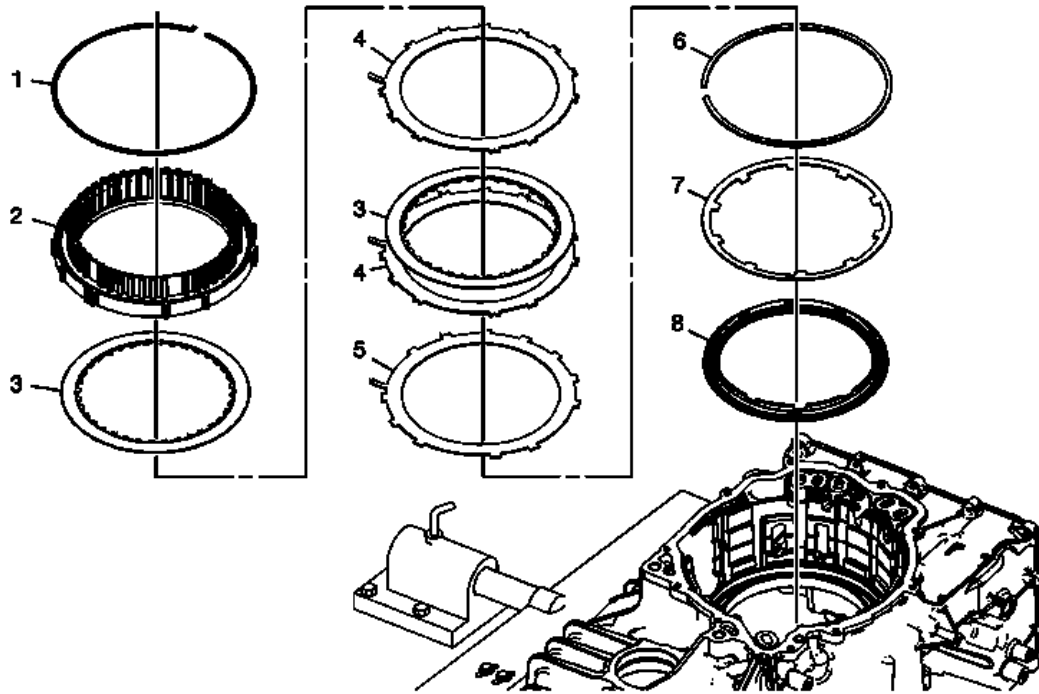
Identifying Low, Reverse Clutch & 1-2-3-4 Clutch Plates
